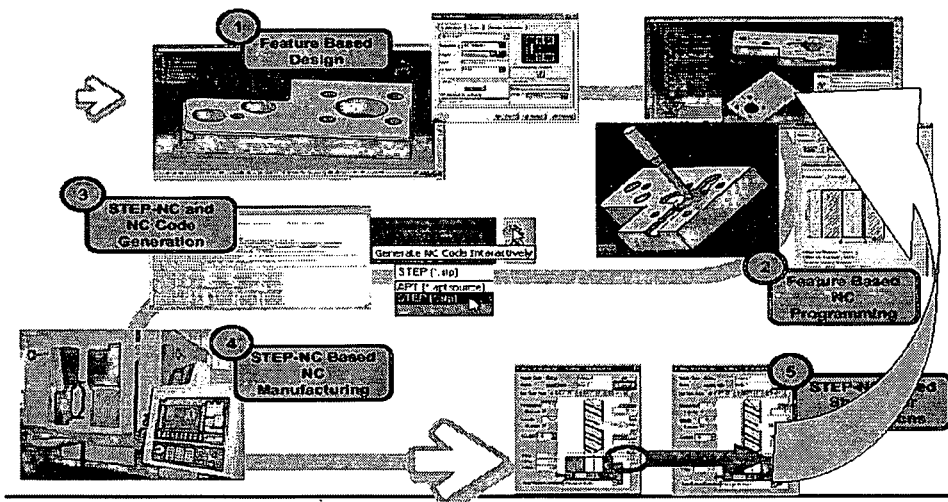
STEP-NC LINKING ALL MANUFACTURING PROCESSES
